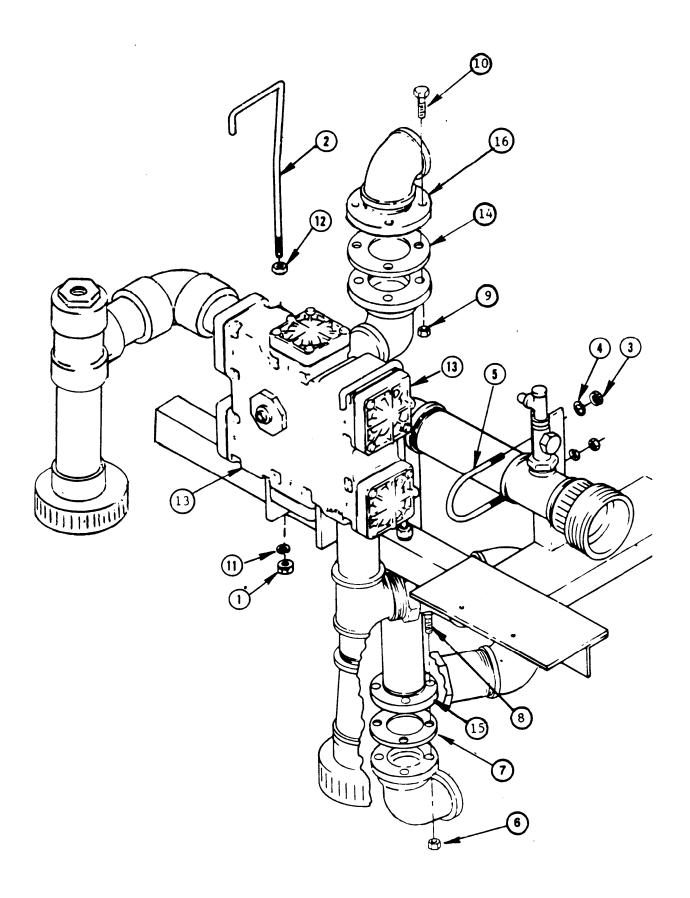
Multimedia Filter Control Valve Piping Assembly
